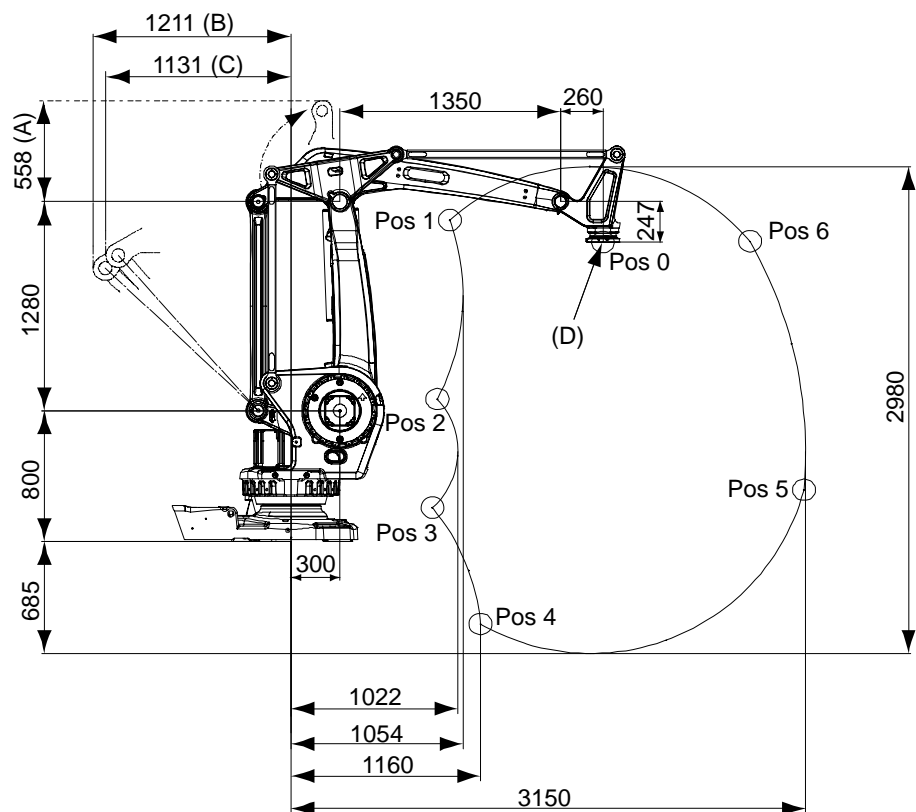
The extreme positions of the robot arm specified at the tool flange center (dimensions in mm).
